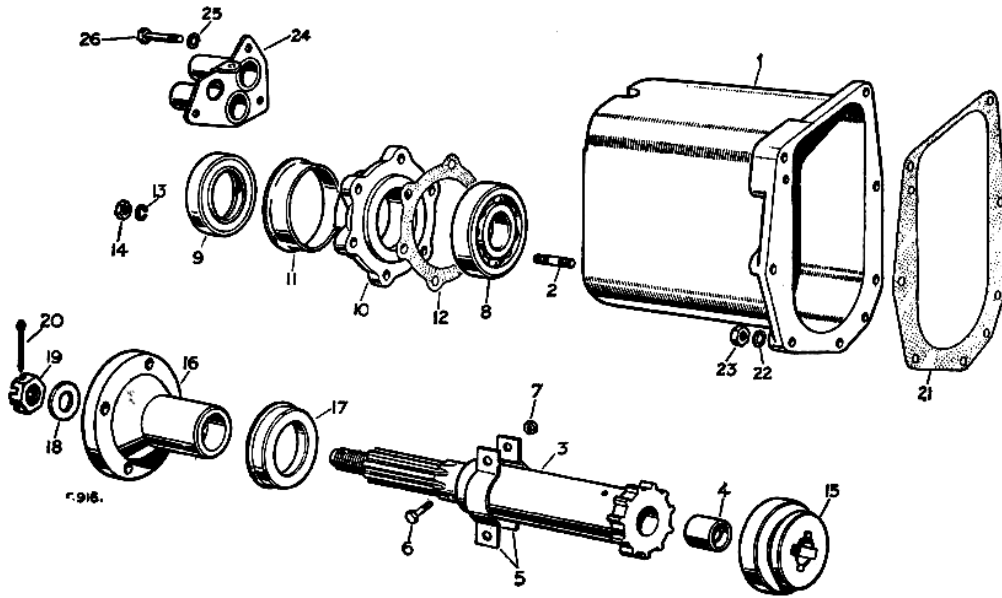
Layout of the gearbox unit: front wheel drive, transfer gear controls and front output shaft and housing
